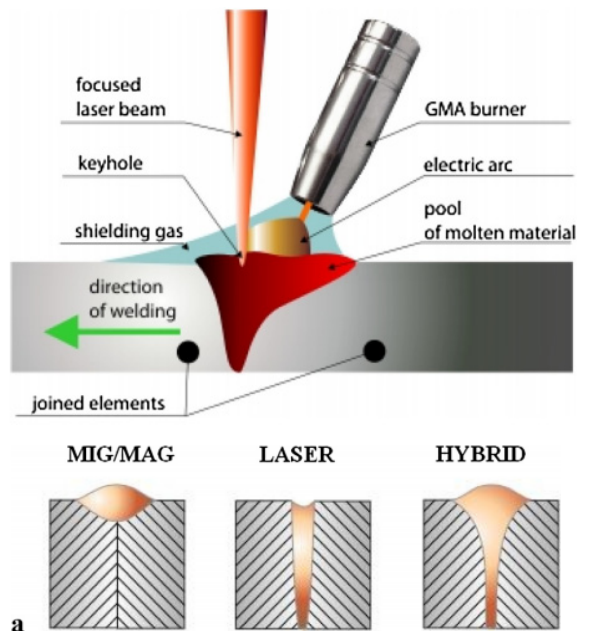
Process and welding bead of laser & arc hybrid system<sup>[31]</sup>
